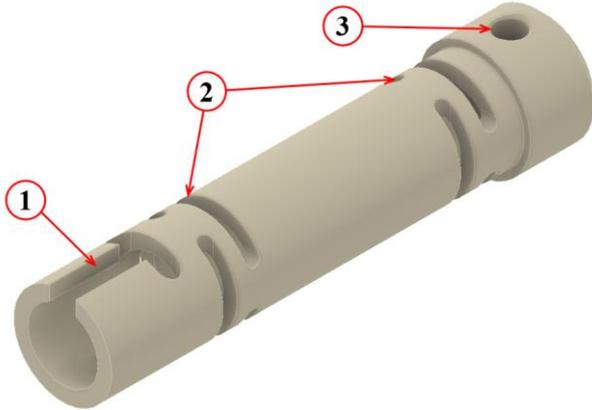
Coupling: 1-Jaws with tight fit on gear shaft, 2-Cutouts, stiff for torsion, compliant for bending, 3-Output pin hole.
